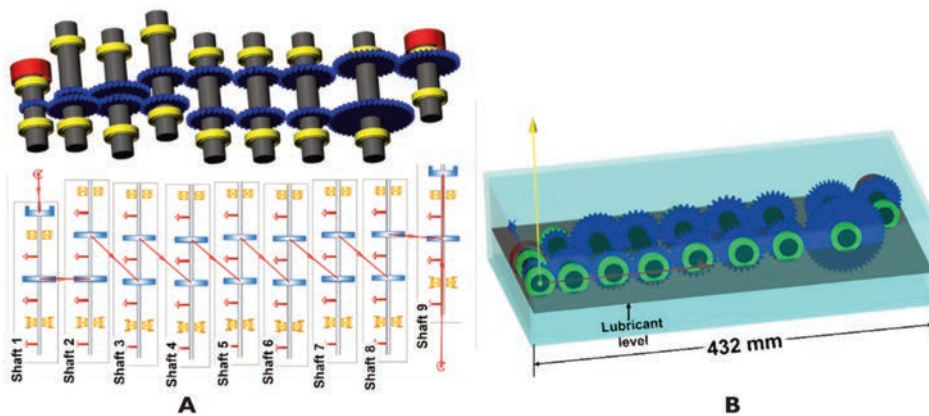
Simulation model of the pepper transplanter gearbox: three-dimensional diagram (A) and gearbox with lubricant (B).
